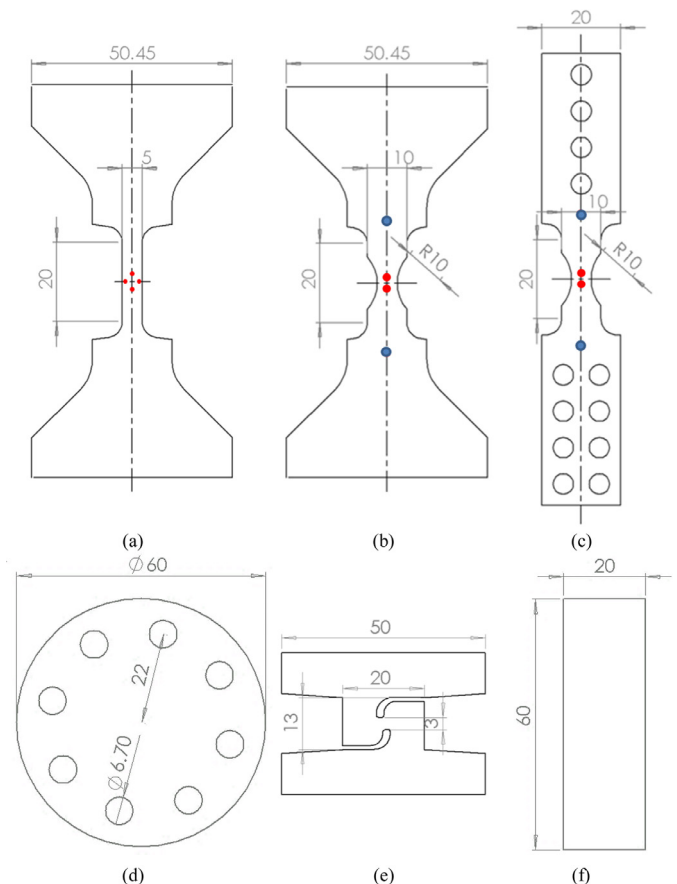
Specimen geometries: (a) UT specimen, (b) NT10 specimen, (c) NT10 specimen for use on SHPB system, (d) Mini Punch specimen, (e) SH specimen and (f) VB bending specimen.
